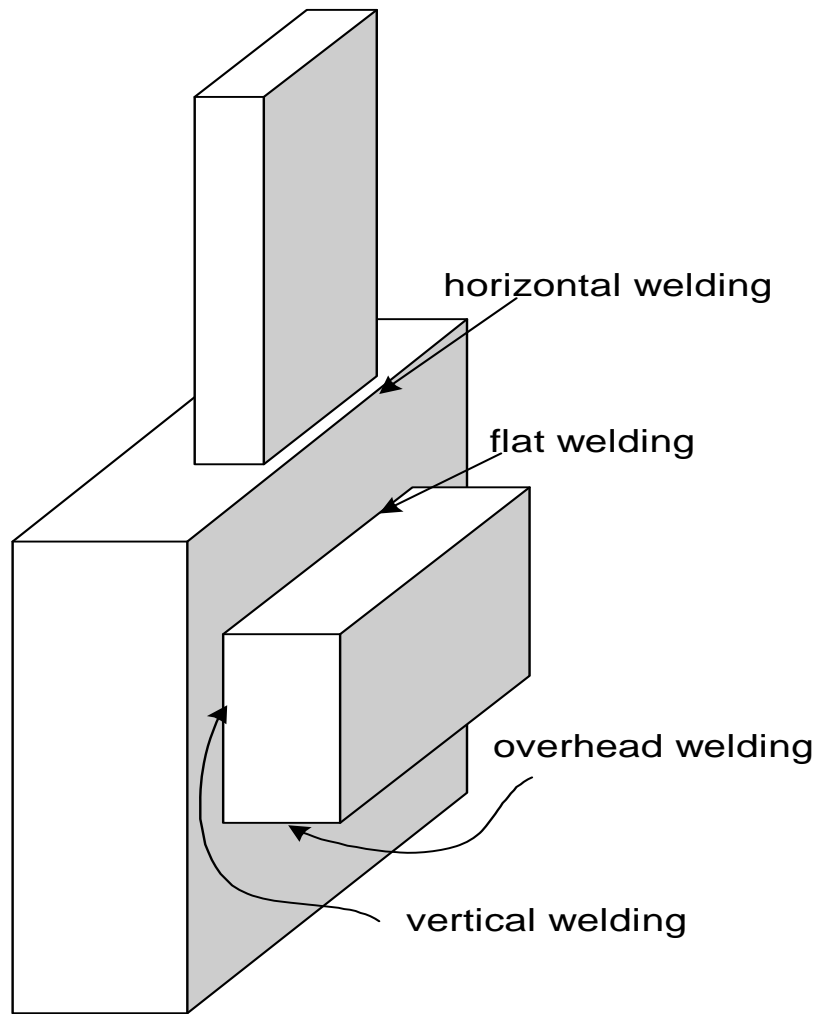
Scheme of placement of components to be welded for different types of welding positions including overhead welding
